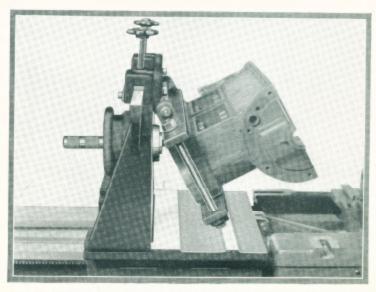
C—The Pilot Ring of the Centering Plug Facilitates Centering the Cylinder Concentric with Spindle of Lathe.
